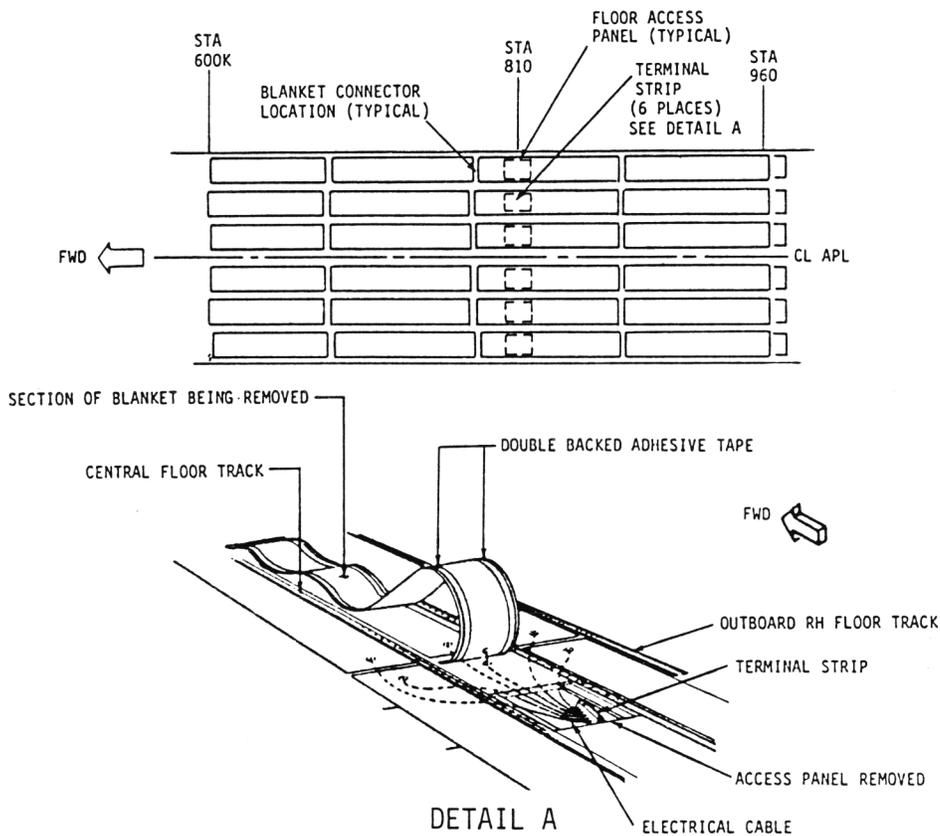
BOEING 707,720 FLOOR HEATING BLANKET
